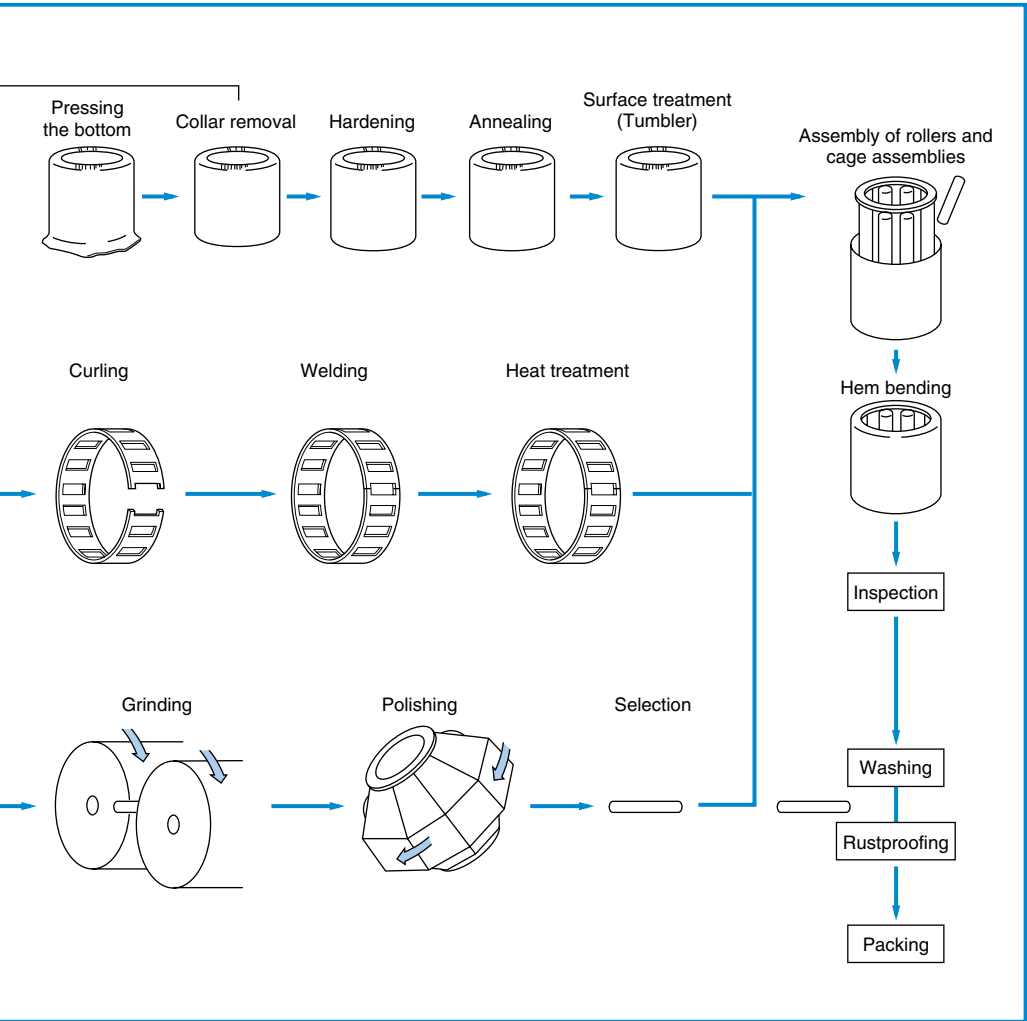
Processing method for drawn-cup needle roller bearings
